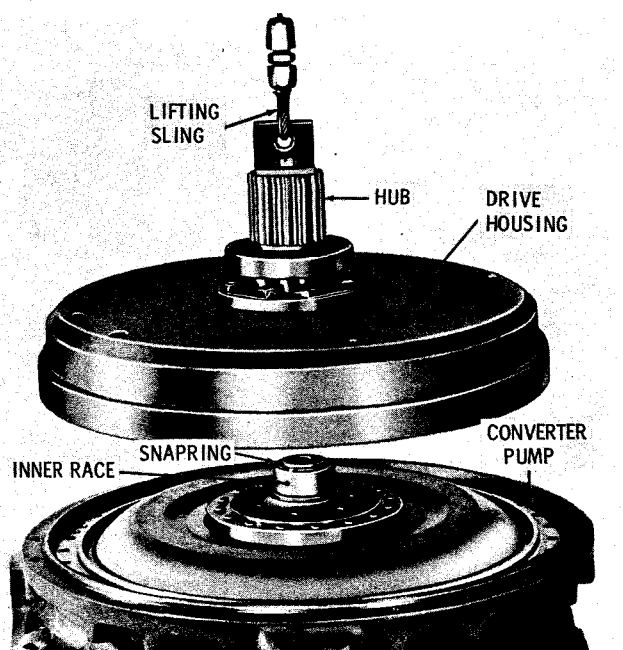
Installing converter drive housing assembly (CT, CBT) S1722
